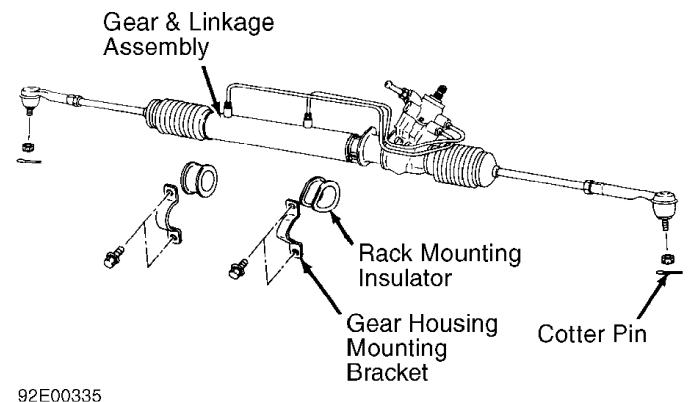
Removing Power Steering Rack Assembly (G20) Courtesy of Nissan Motor Co., U.S.A.
